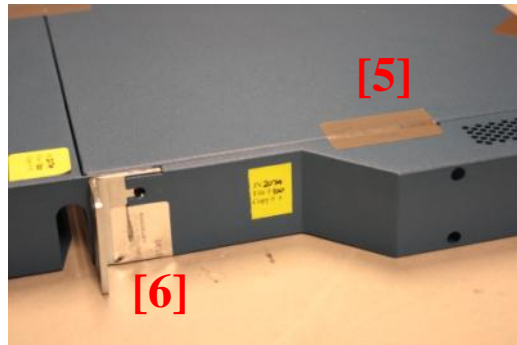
PA-500 Right Side Tamper Seal Placement (2)
